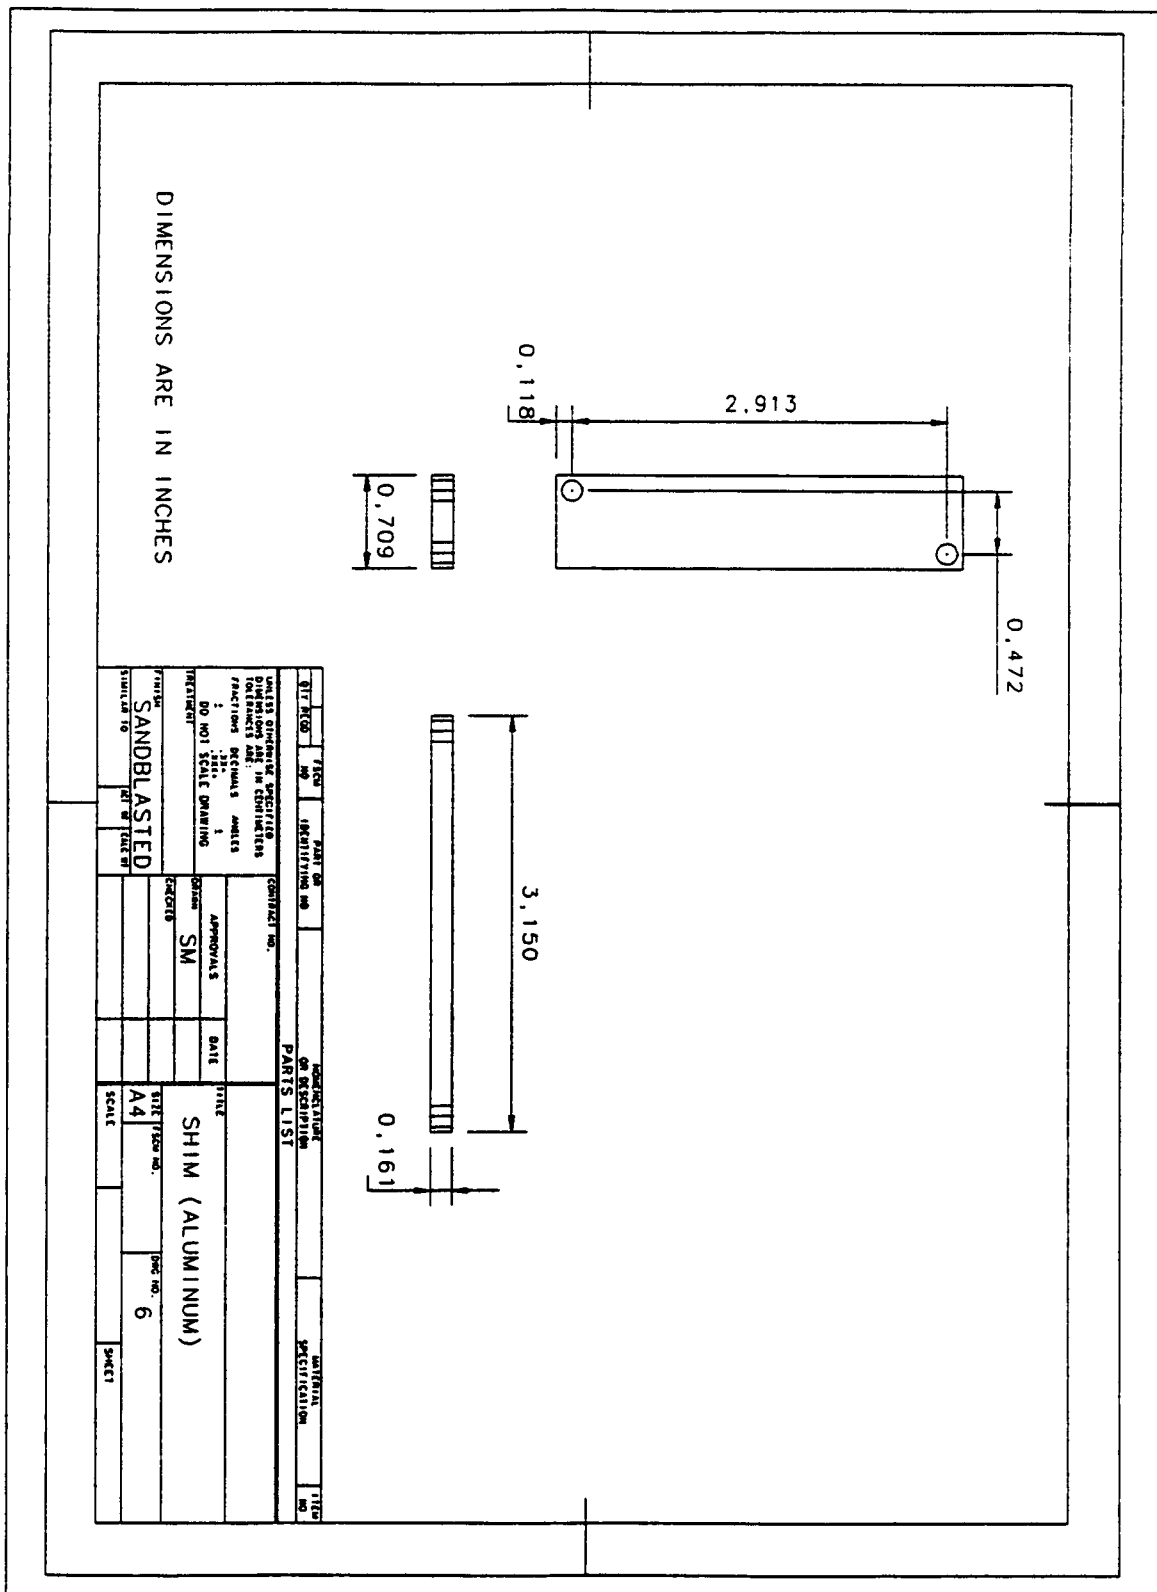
Small shim custom machined to provide the interface between the aluminum plate and the read head of the linear scale
